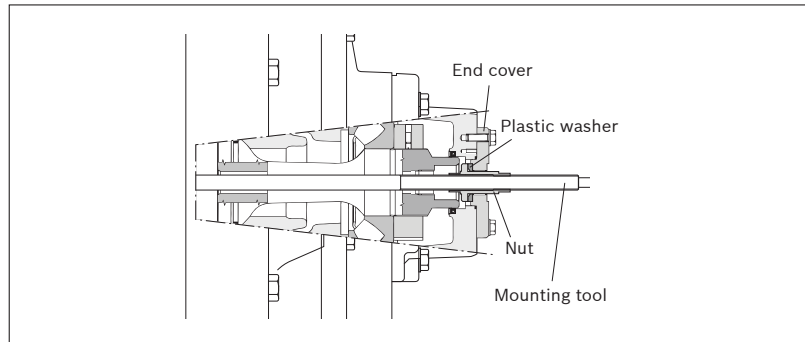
Removal of MA 141–200 and MB 283–800
